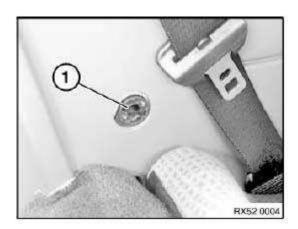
Bearing Bushing Courtesy of BMW OF NORTH AMERICA, INC.
